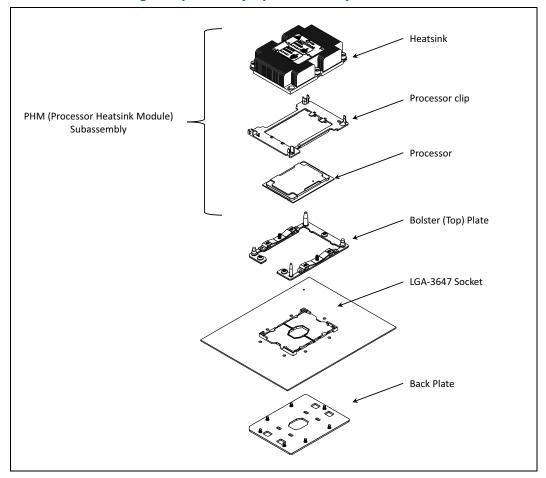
LGA3647-0 Enabling Components (Exploded View)
